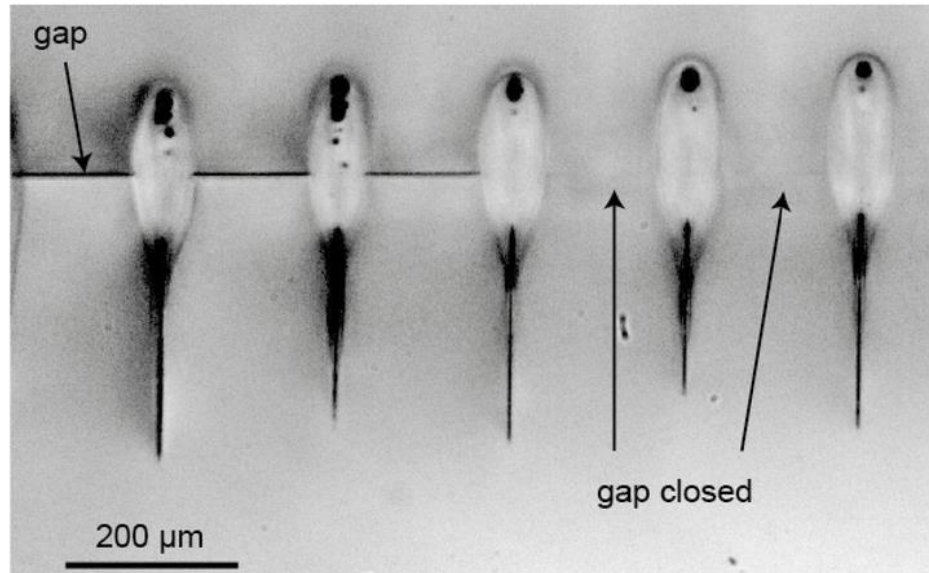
Ultrafast laser weld seams in fused silica without optical contact. Laser propagation direction is from top to bottom, and from left to right laser focus position is shifted up from interface. At a particular focus position the gap is closed [22]. – Permission requested from the publisher.
